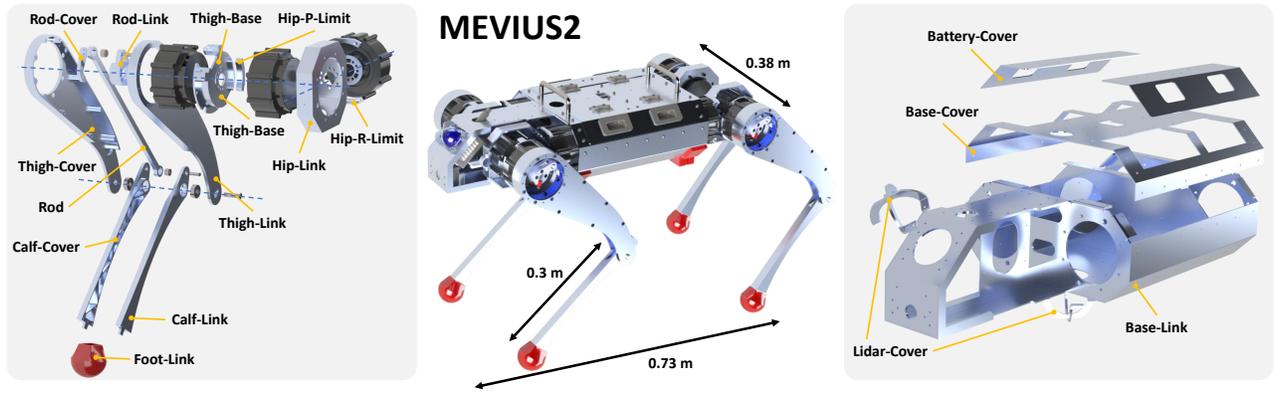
Design overview of MEVIUS2: excluding mirrored parts, the robot consists of 16 unique metal components, three of which are fabricated using sheet metal welding to achieve complex and large geometries as single integrated parts.
